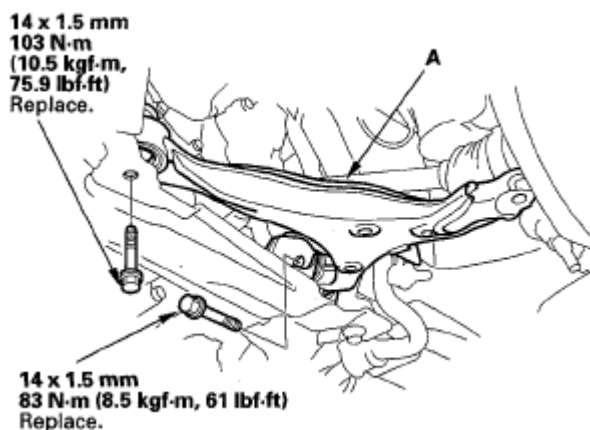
Identifying Lower Arm With Flange Bolts And Torque Specifications
